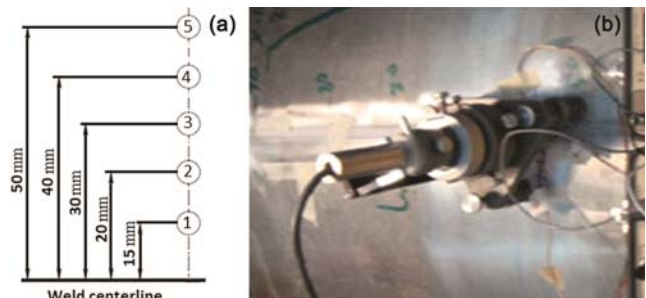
Welding residual stress measurement (a) gauge positions and (b) hole drilling machine.
